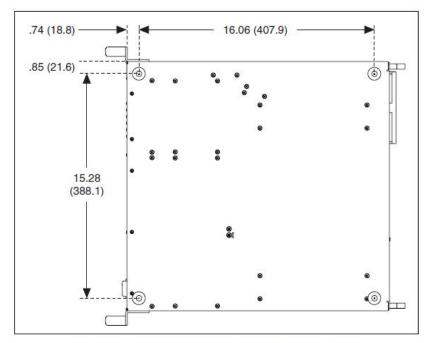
PXI-1056 Dimensions (Bottom) in Inches (mm)
